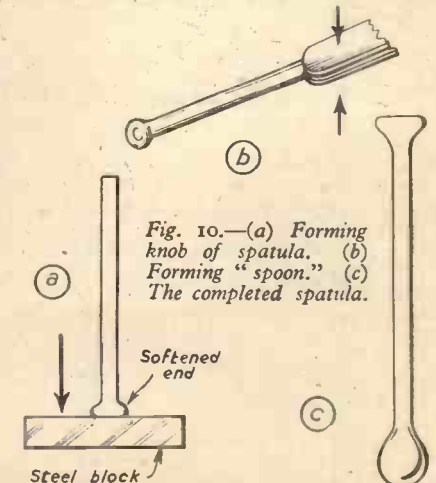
(a) Forming knob of spatula. (b) Forming "spoon." (c) The completed spatula.
